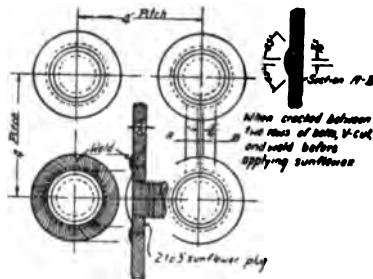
HOW CRACKS AT STAY-BOLT HOLES ARE WELDED.
